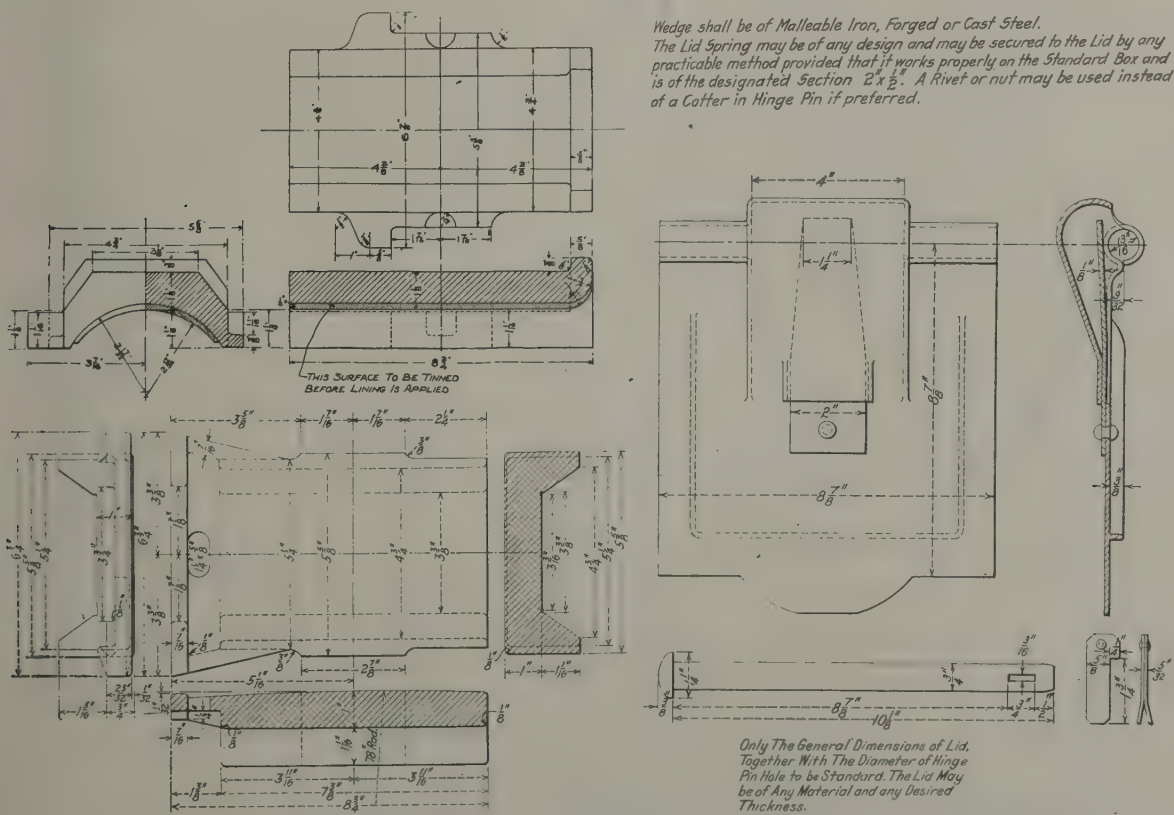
M. C. B. Standard Bearing, Wedge and Journal Box Lid for 5 in. by 9 in. Journal. (M. C. B. Sheet 9.)
